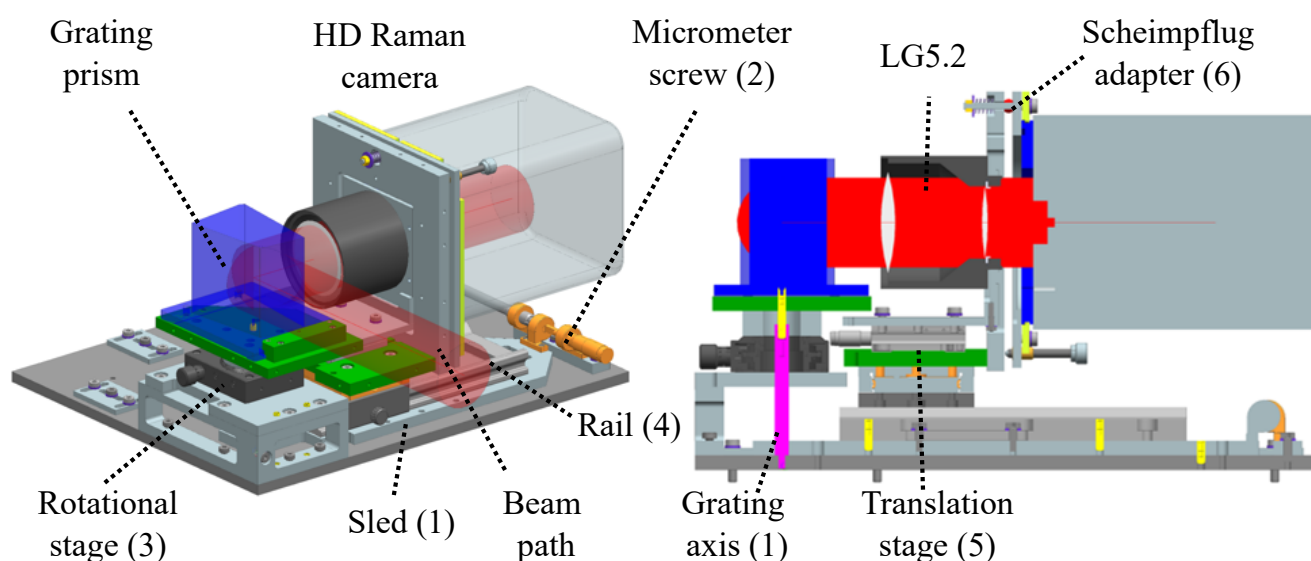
Spectrometer extension CAD design as isometric view (left) and cross-sectional side view (right).
